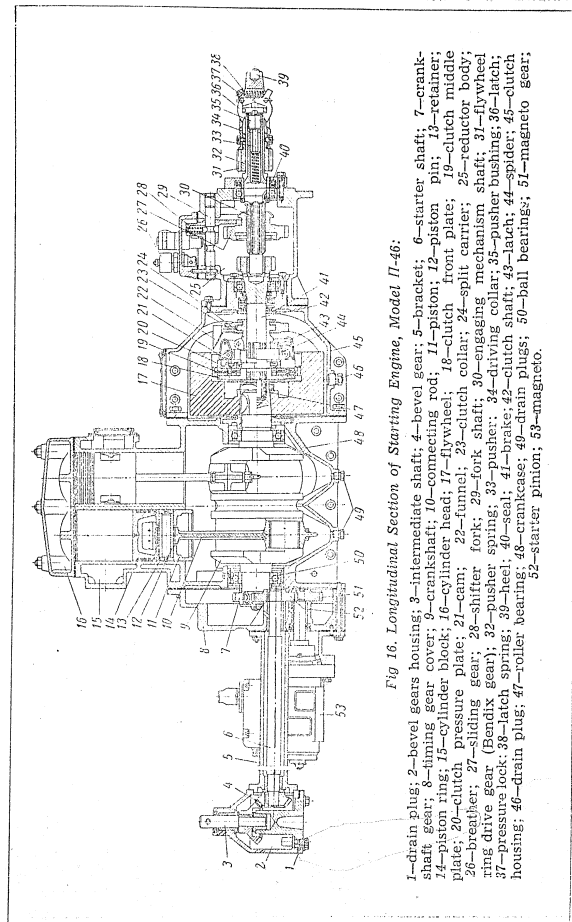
Longitudinal Section of Starting Engine, Model II-46:
